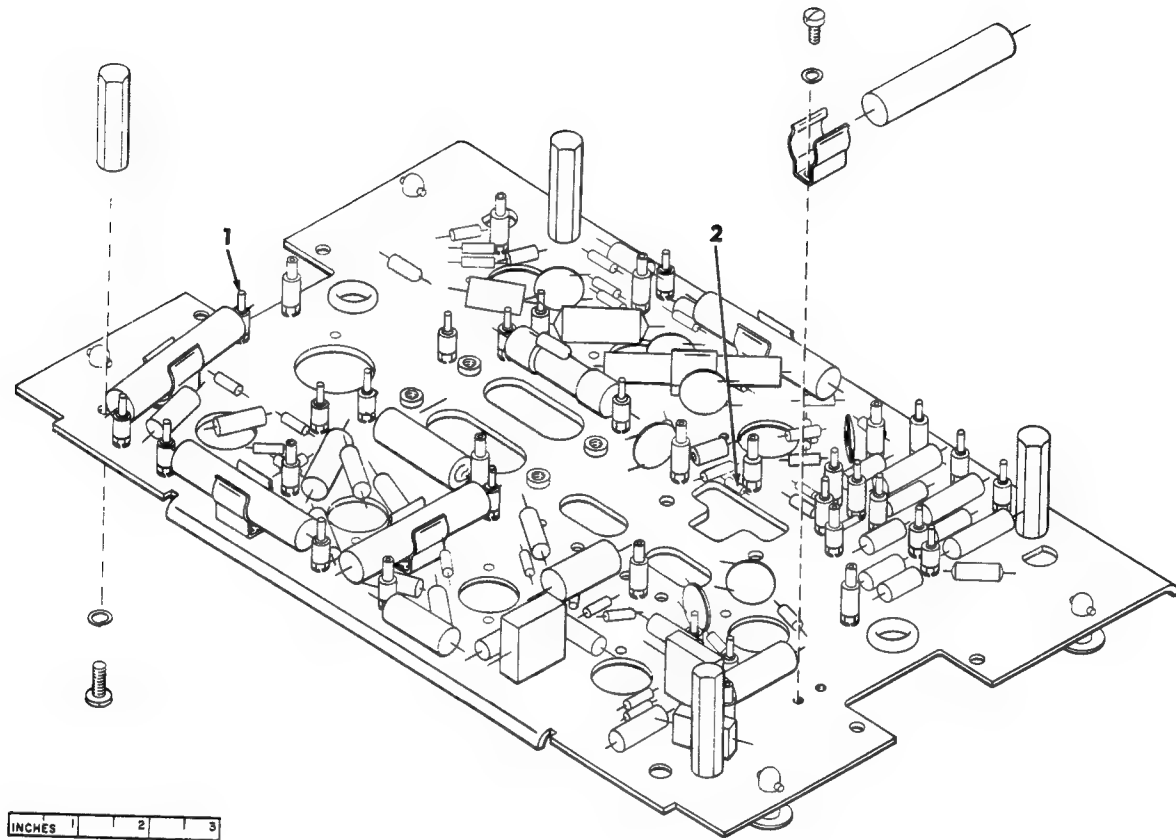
Synchronizer, electrical (9136696)—partial exploded view
